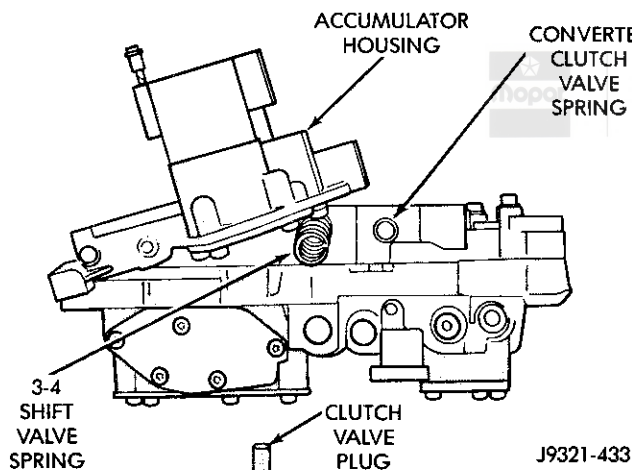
3-4 Shift And Converter Clutch Valve Springs And Plug
